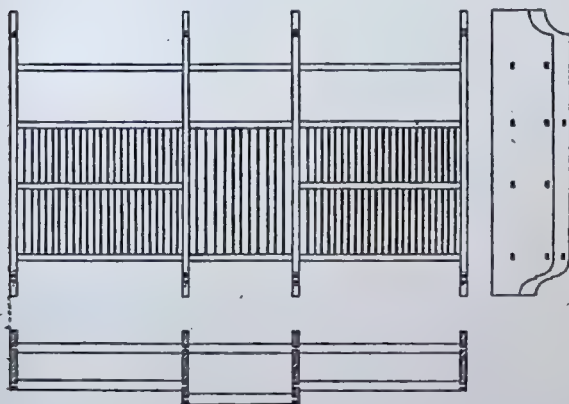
PLATE RACK: FRONT AND SIDE ELEVATIONS AND SECTIONAL PLAN (No. 359.)
